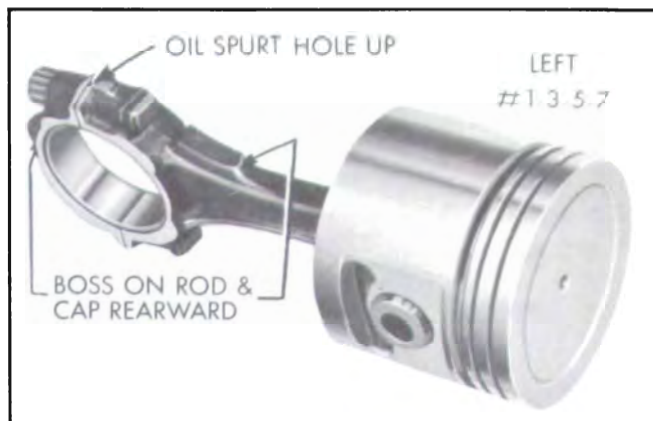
V-8 Left Bank Piston and Rod Assembly
